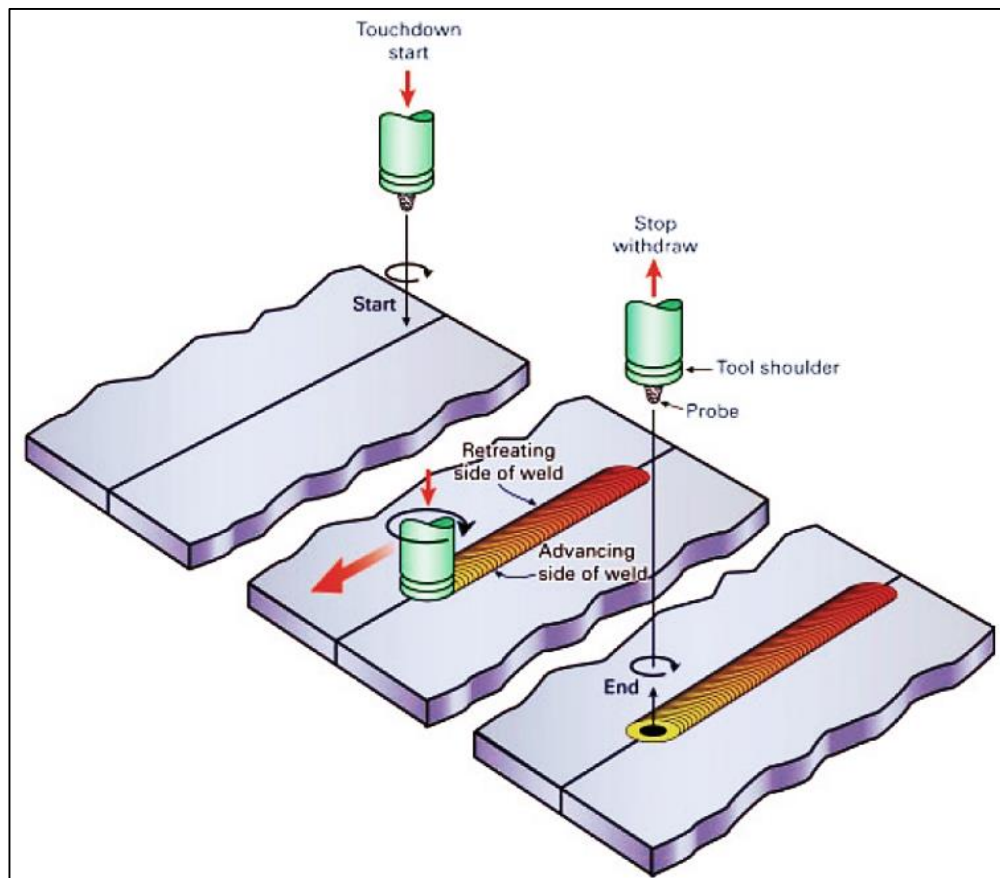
Schematic diagram of friction stir welding [16].
